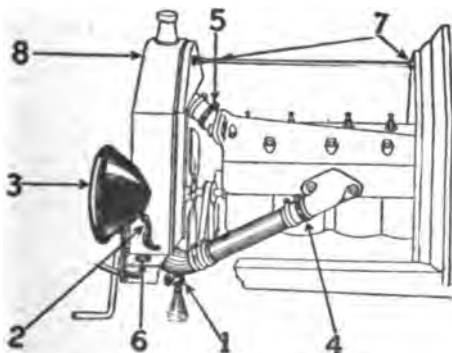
Parts of Ford car to be removed in mounting Gray & Davis starting and lighting system
